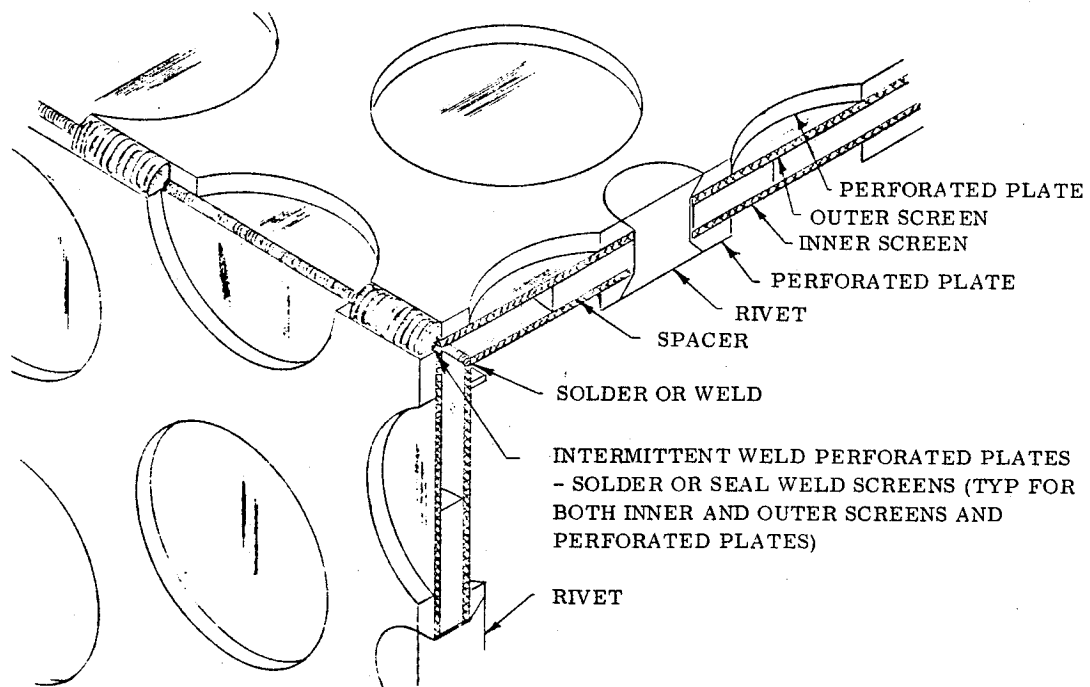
Typical Dripless Corner Joint Construction Layout
